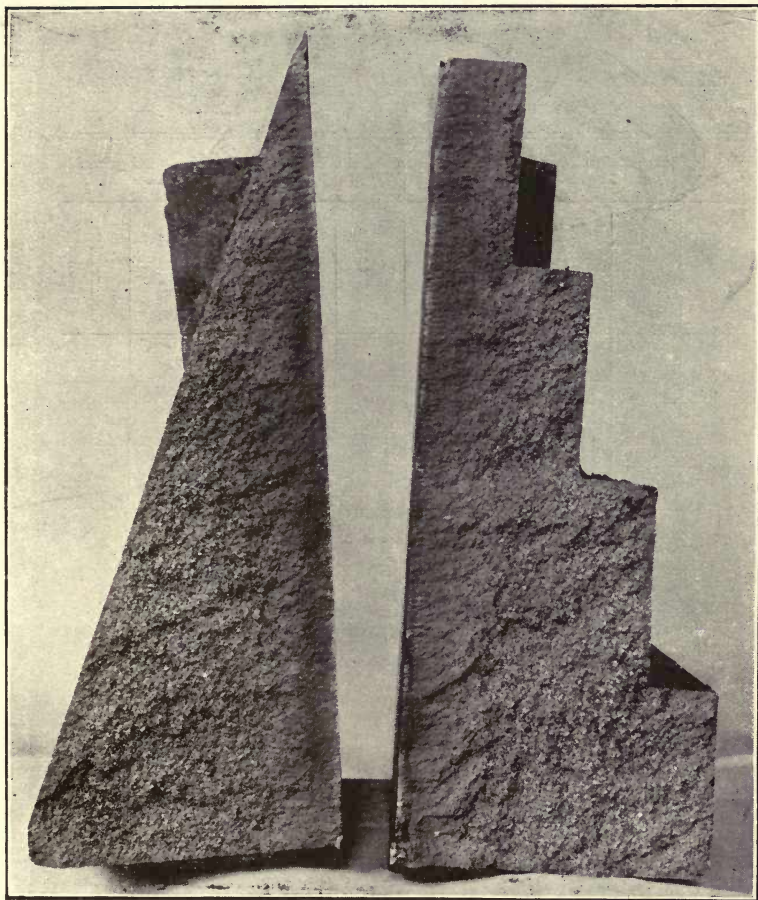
FRACTURE OF CHILL TEST PIECES IN SERIES C.
